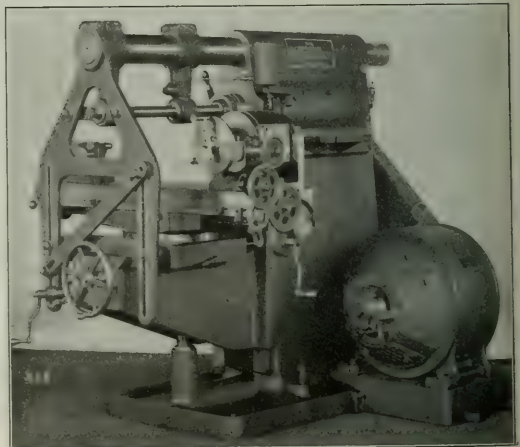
View Showing Motor Attachment and Outer Arbor Bearing Support.
